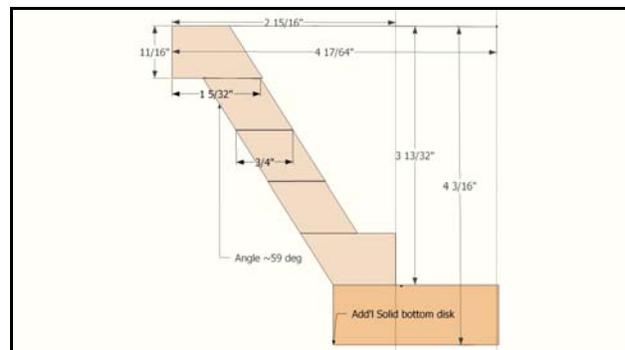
Cross Section of Blank (Five half-rings cut from a board and stacked).
